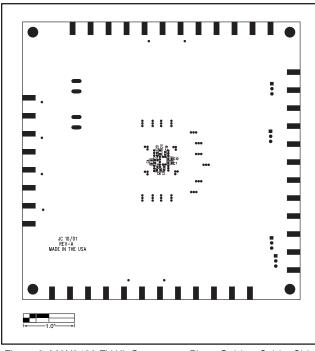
MAX9400 EV Kit Component Place Guide—Solder Side
